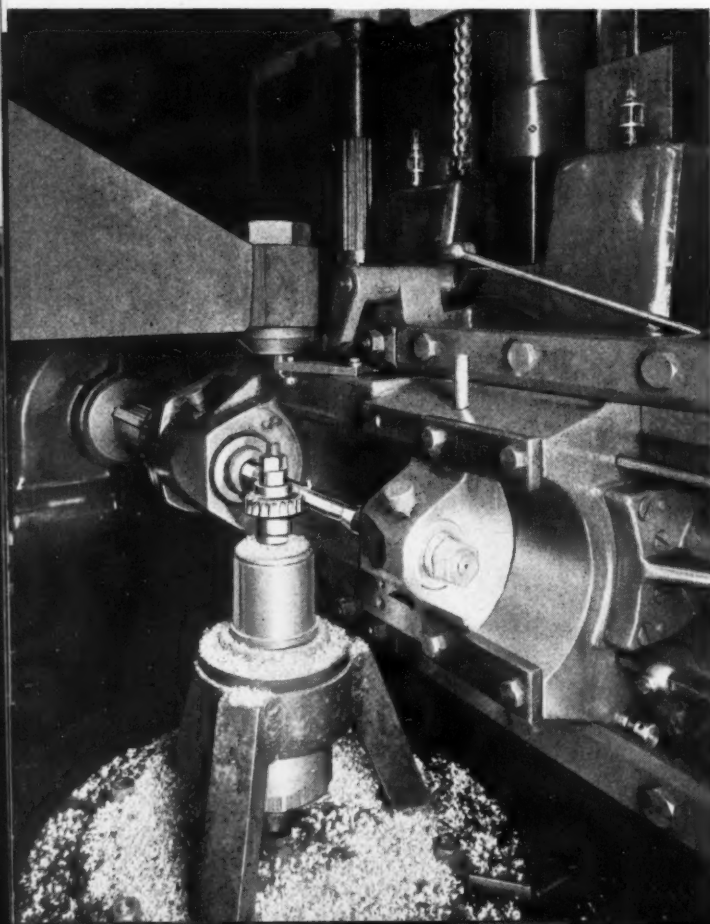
(Below) Because of the Variety in Size of Worm-gears Called for, a Fly Cutter is Usually Made up for Each Job
